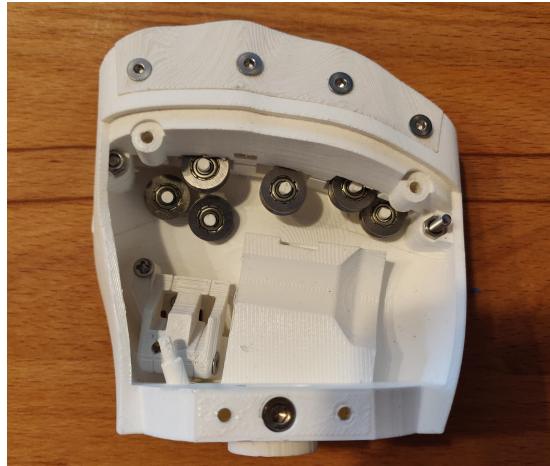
Fully assembled palm excluding motor unit. All parts besides the standard parts are 3D printed.
